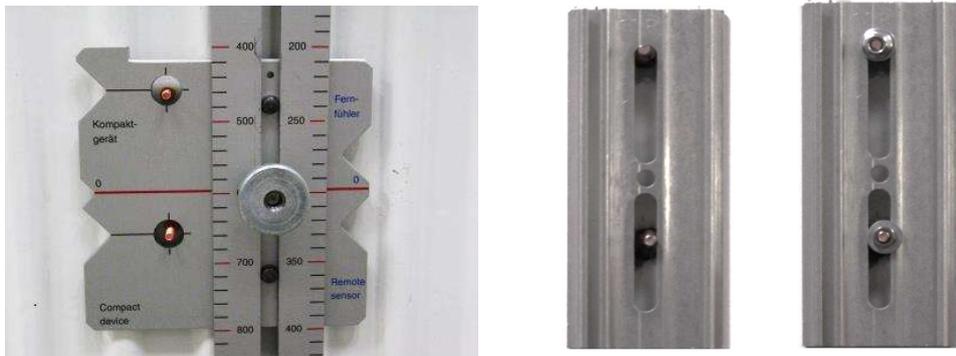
Distance between welding studs with mounting gauge and fastening of the aluminum heat conductor
